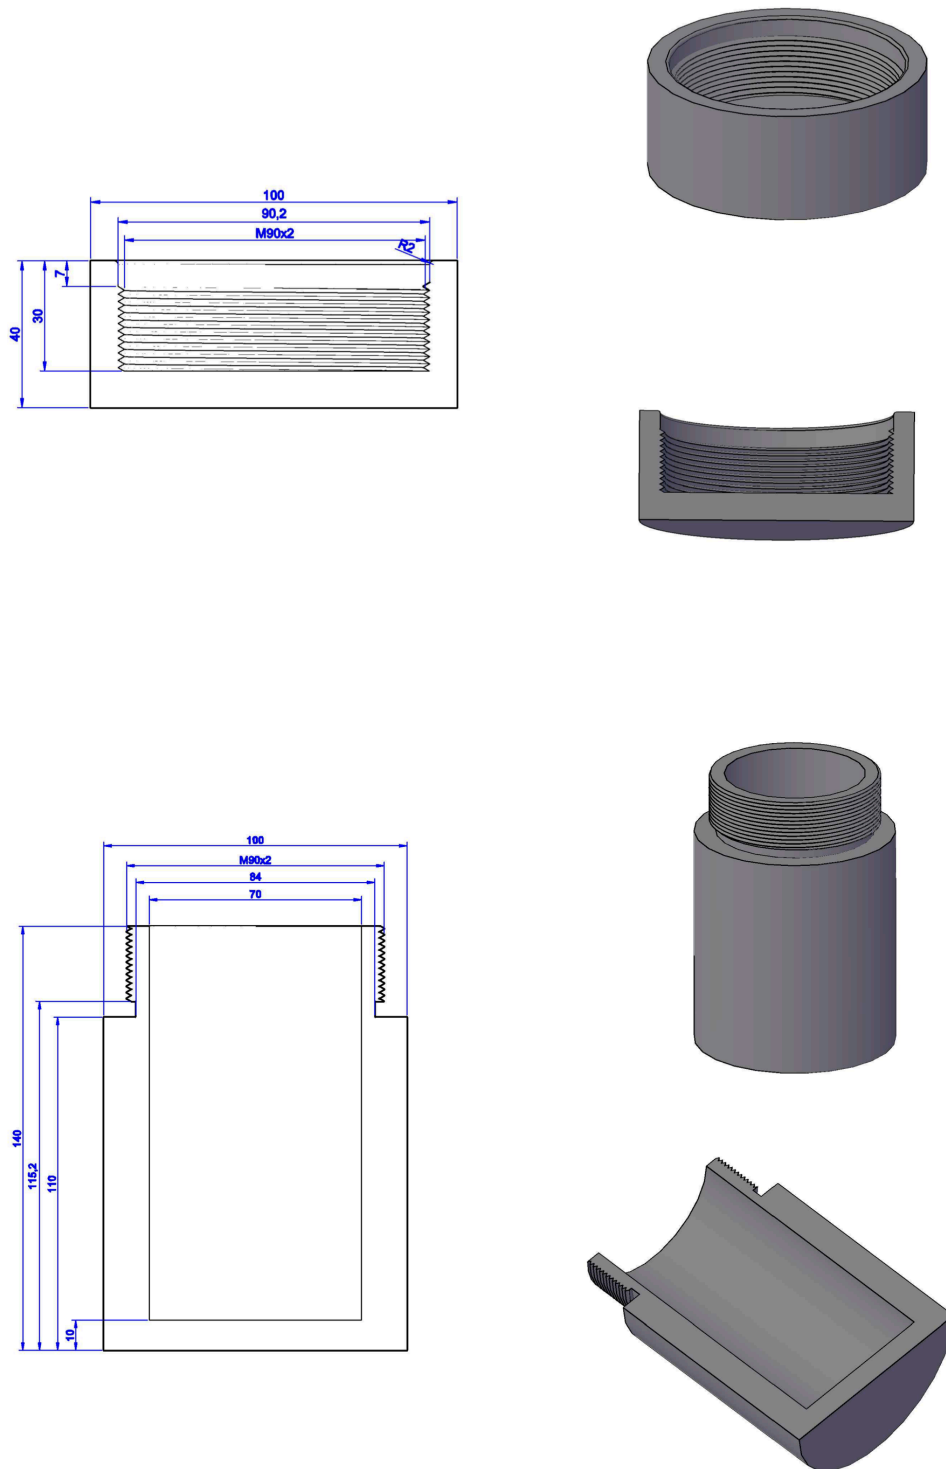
Sketch of the steel cap and steel cylinder. The dimensions are marked on the sketch. The two parts were made in the PTS mechanical workshop (Vedvik, 2017).
